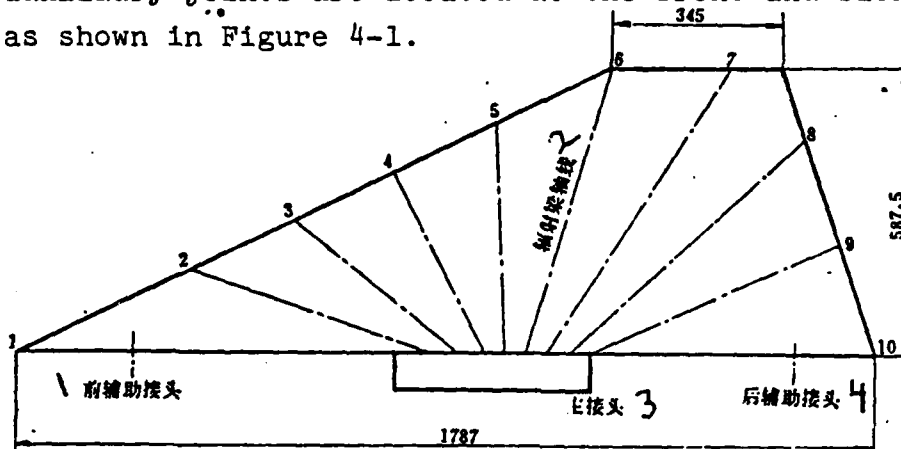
1) front auxiliary joint; 2) radial beam axis; 3) main joint; 4) back auxiliary joint.
